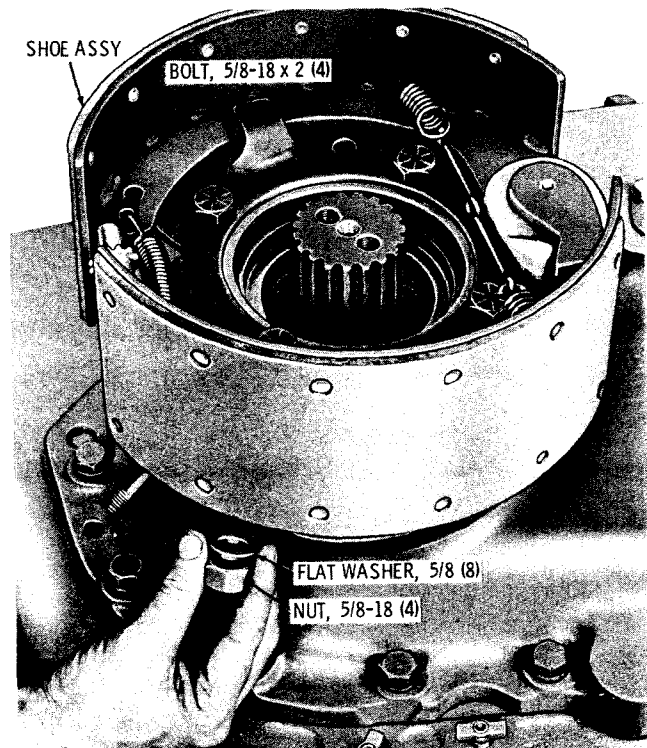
Removing nuts from bolts which retain brake shoe assembly
